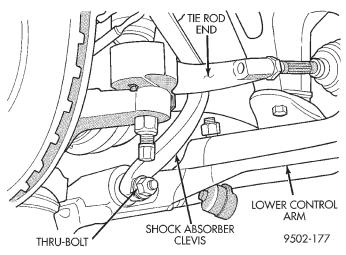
Clevis To Lower Control Arm Attaching Bolt
